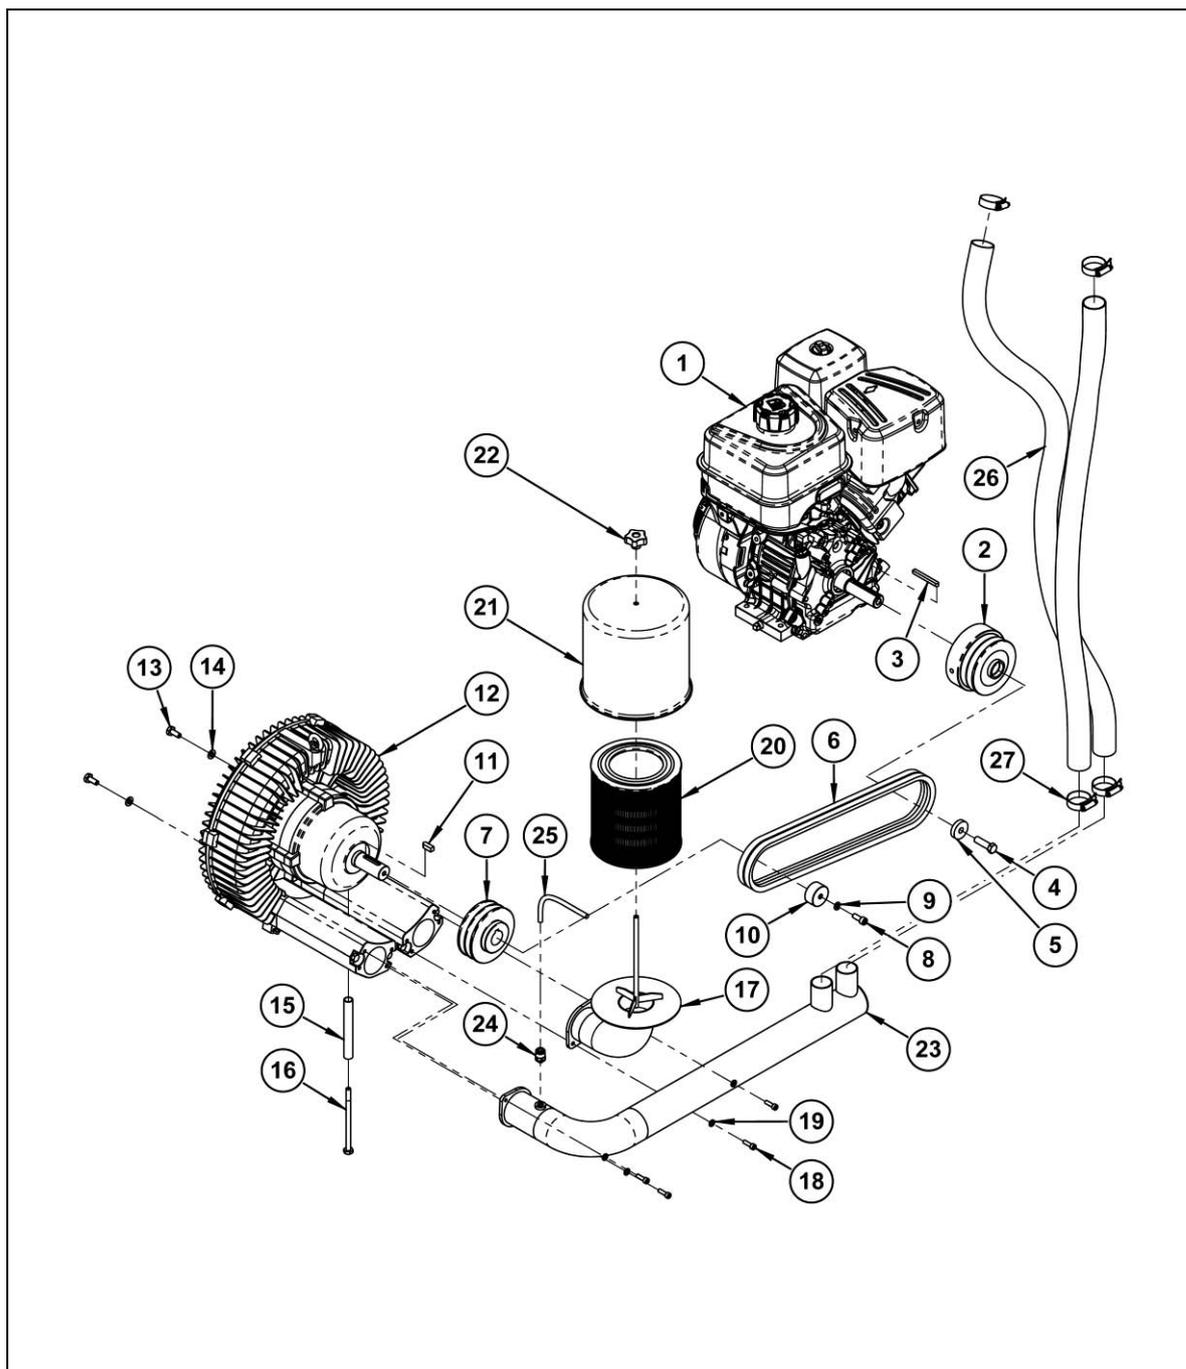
Engine, Blower, Drive Belts & Air Tubes
